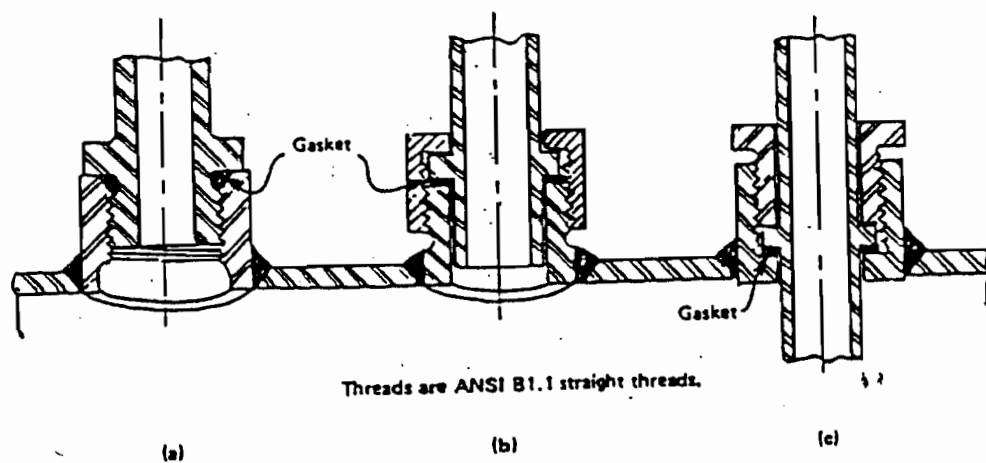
TYPICAL THREADED JOINTS USING STRAIGHT THREADS
